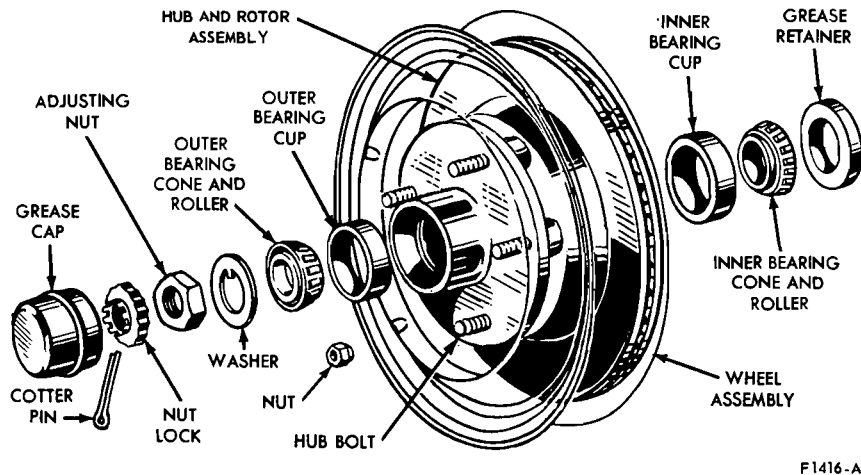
Front Hub and Rotor Bearing and Grease Retainer Disc Brakes—Typical
